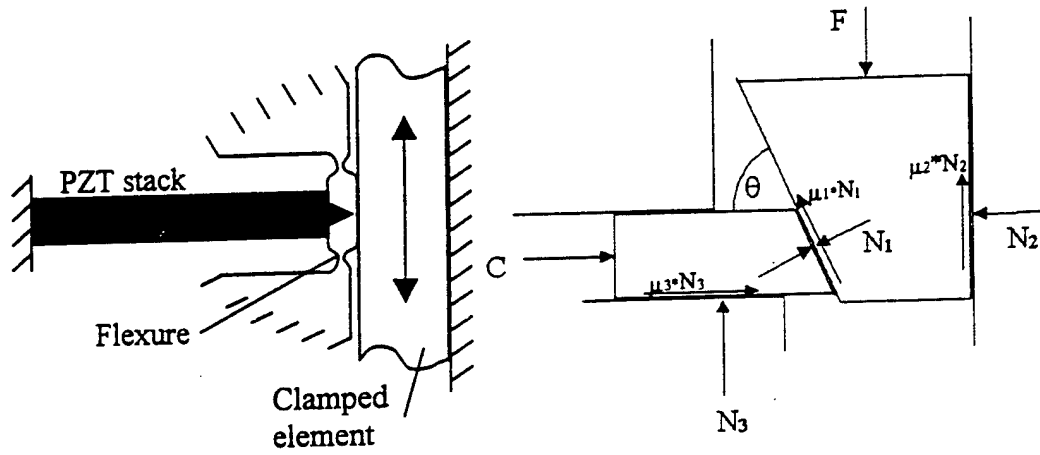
a) Direct clamping method b) Passive wedge clamping method
